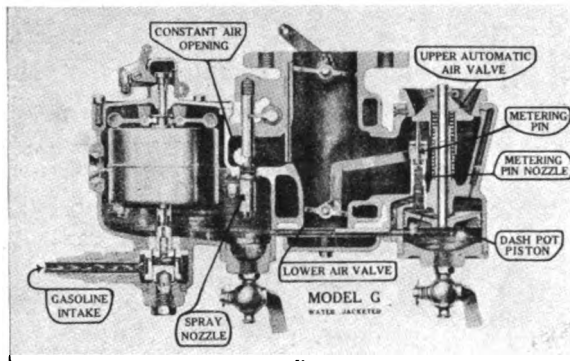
Cutaway View, Showing Operating Components of the Rayfield Model G Carburetor.
